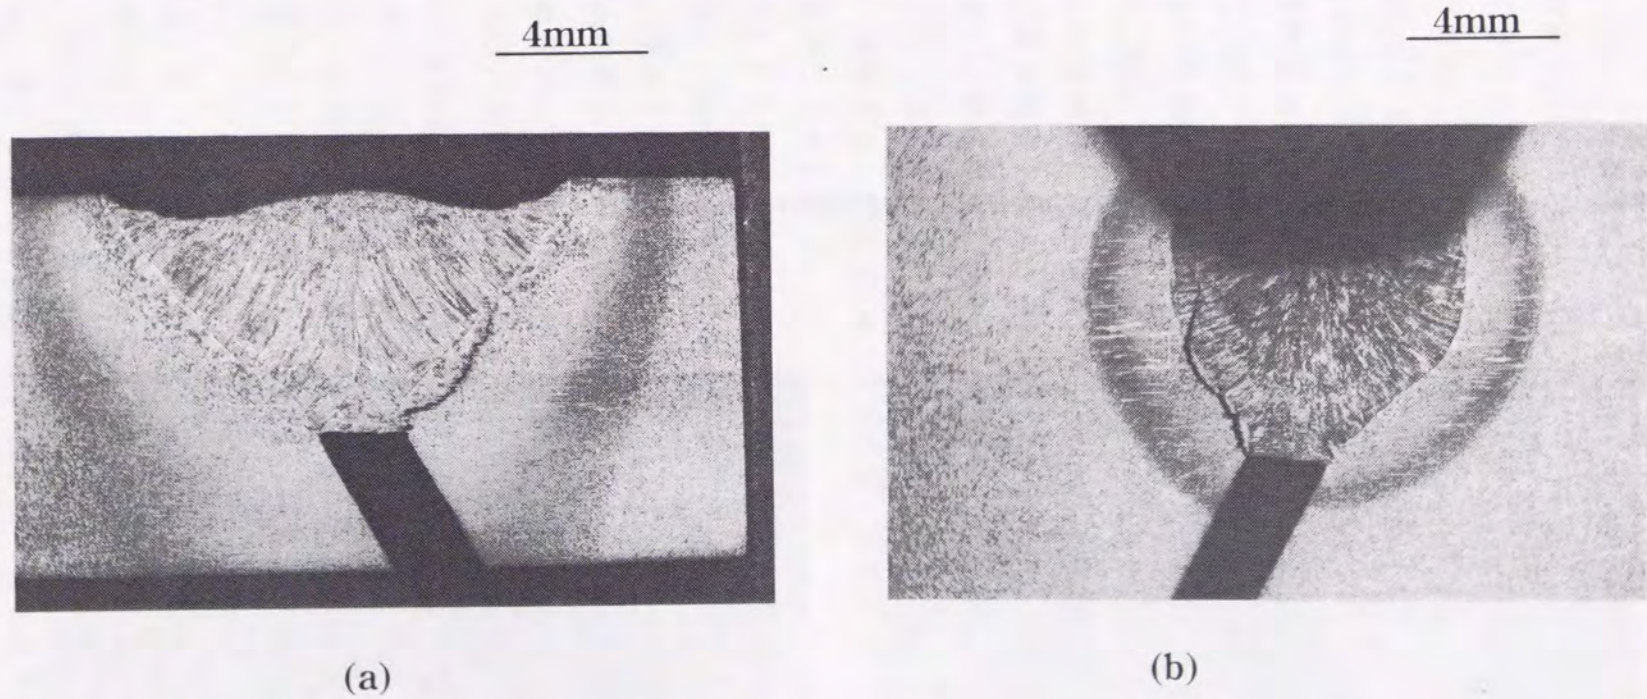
Cold cracks at weld root (Steel D, a;10mm b;40mm thickness)
